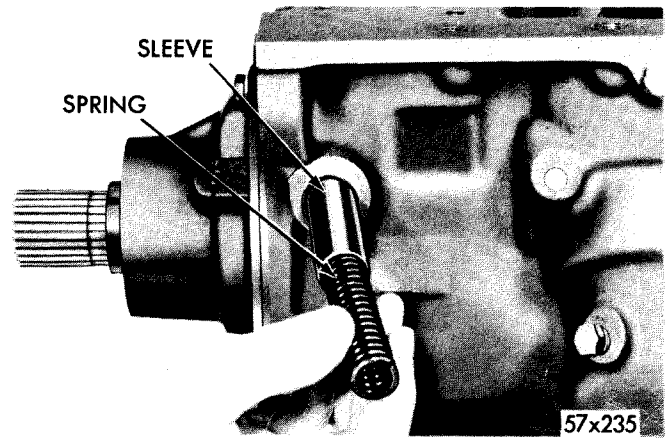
Removal and Installation of Regulator Valve Spring and Sleeve
